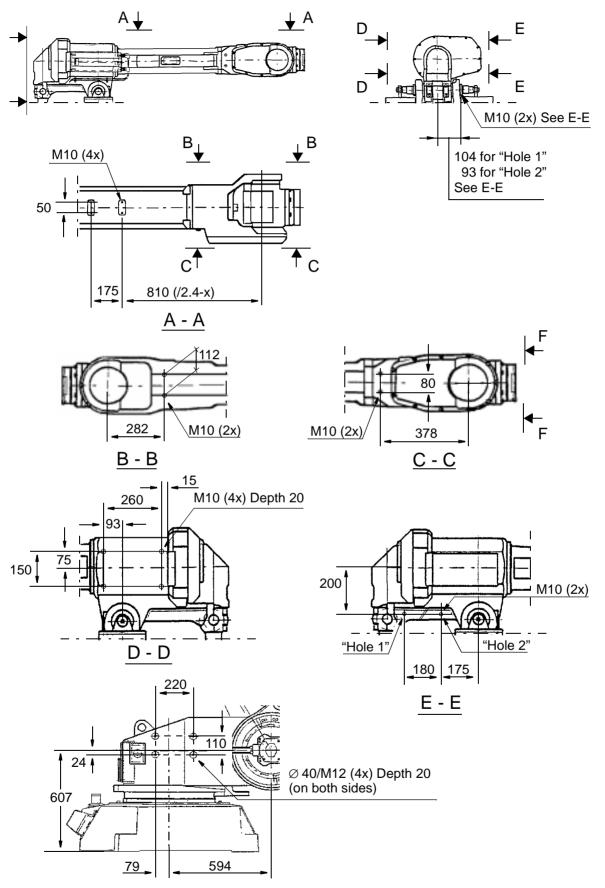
Holes for mounting extra equipment (dimensions in mm).
